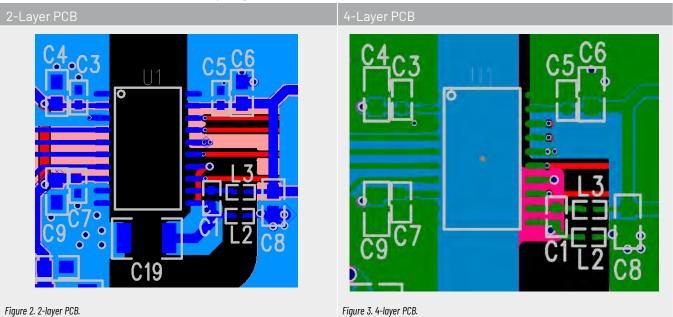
PCB decoupling for 2-layer and 4-layer PCB.
